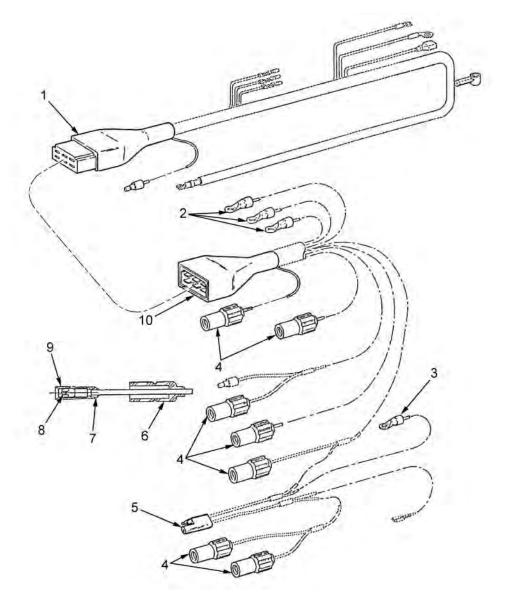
APU Control Box Wiring Harness Inspection and Repair.
